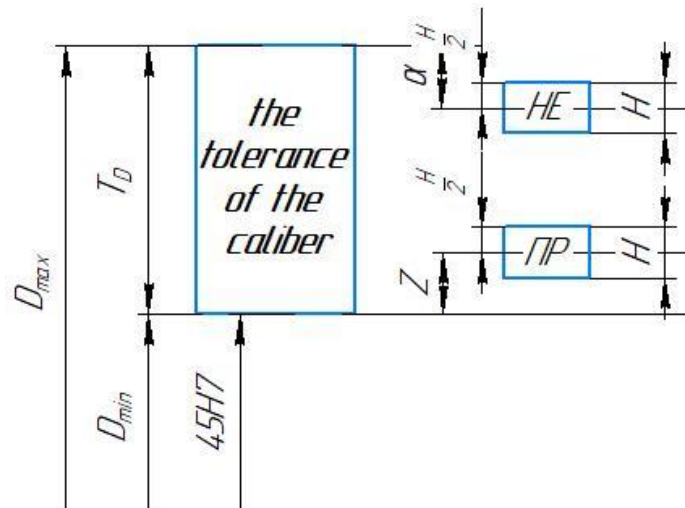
Is the layout of the 45H7 tolerance limits
